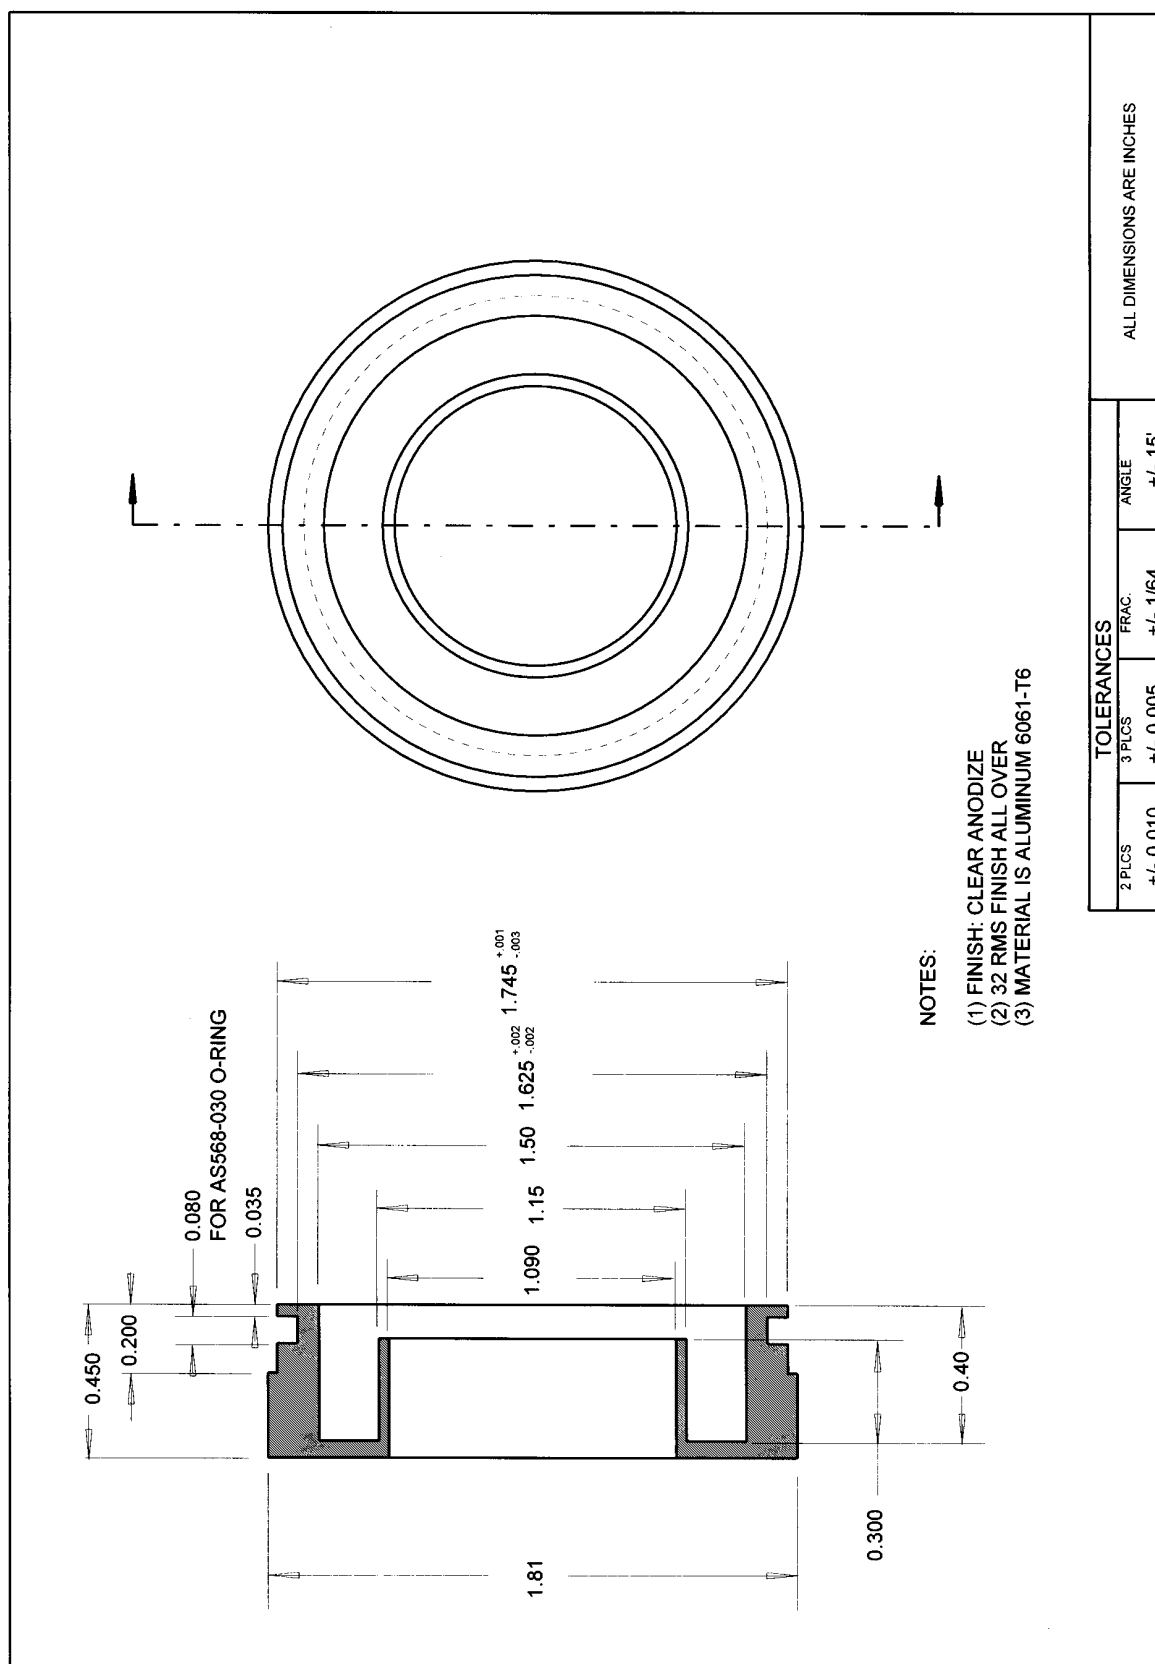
2.5-MICRON IMPACTOR WELL, LOWER SECTION
